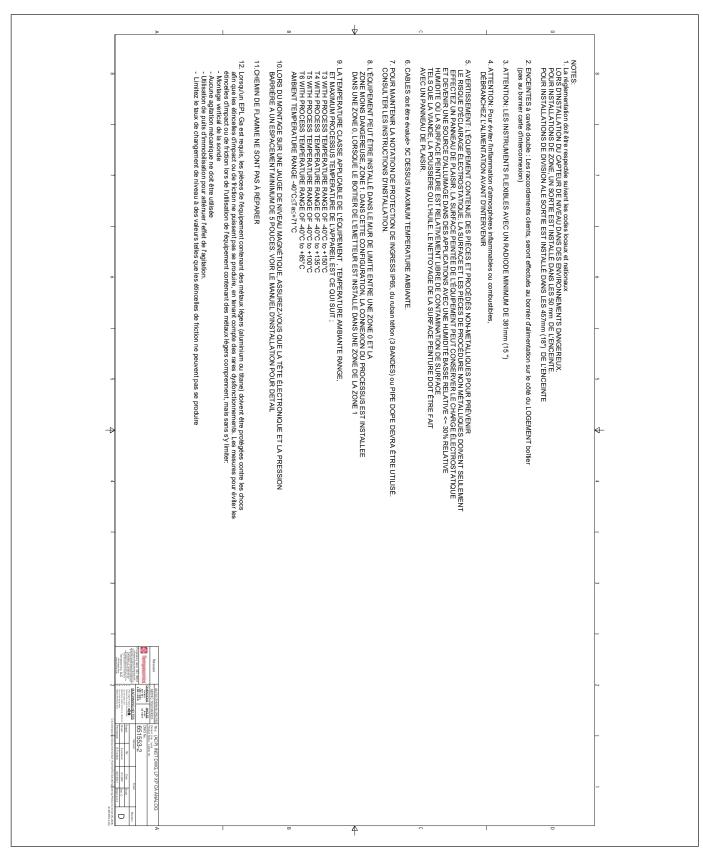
Explosionproof, FMC Installation Drawing, HART®, Page 3
